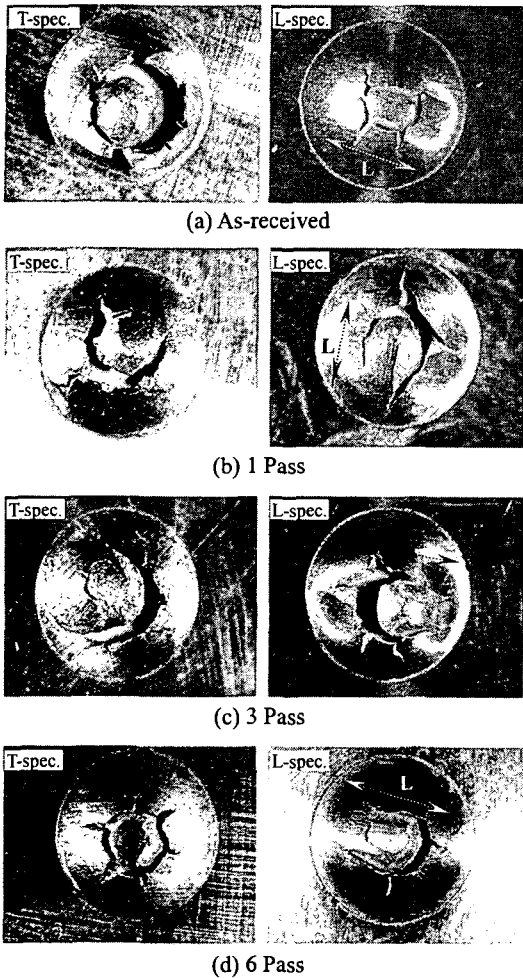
Photographs of the fracture surfaces from small punch test
